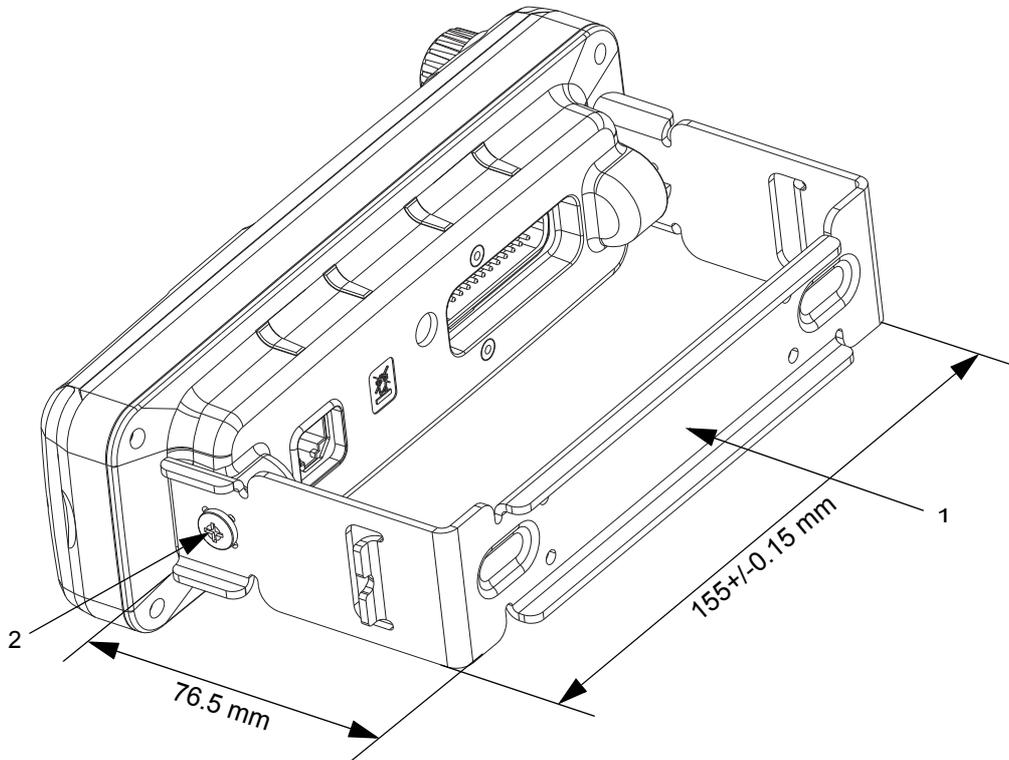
Remote Mount Enhanced Control Head Installation with DIN Mount Bracket
